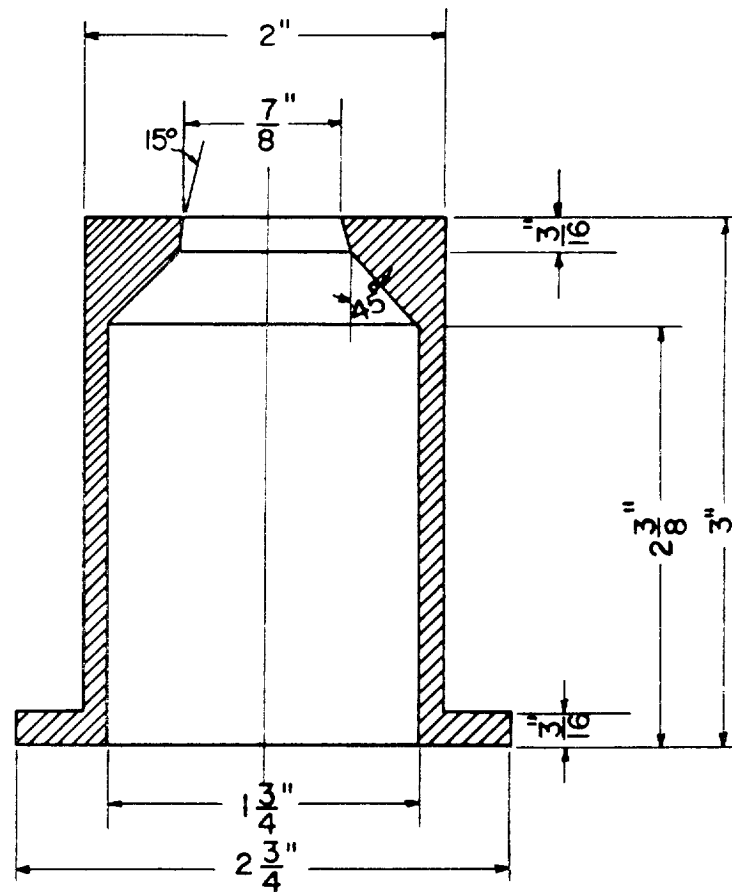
Drawing of Simulated Rocket Engine Combustion Chamber.
